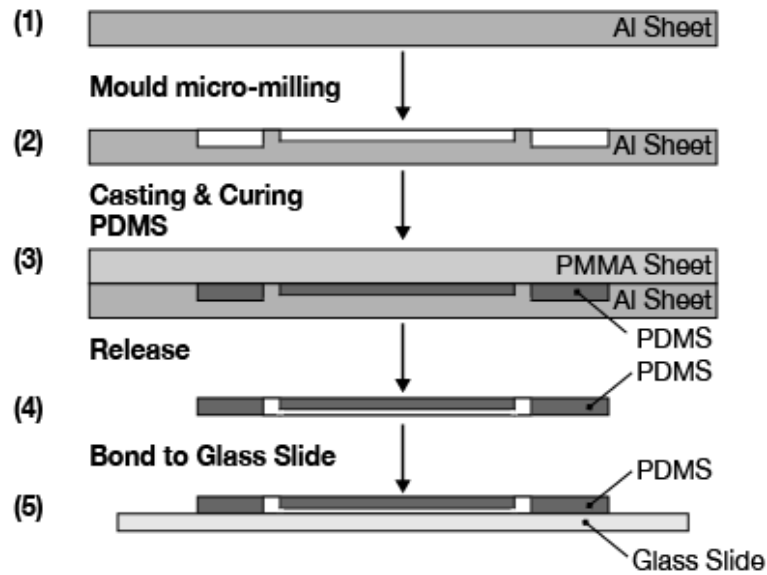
Fabrication process of a mould and a microfluidic chip created in the mould. - A 3 mm thick sheet of aluminium (1) was machined to a mould with standard CNC milling techniques (2). The mould was filled with PDMS monomer, degassed using vacuum and covered with a sheet of PMMA or PC and cured (85°C, 90min) (3). After curing, the PDMS microfluidic chip was released from the mould (4). The PDMS microfluidic chip and a microscope glass slide were exposed to an air plasma and immediately bonded together (5). Figure is not to scale.
